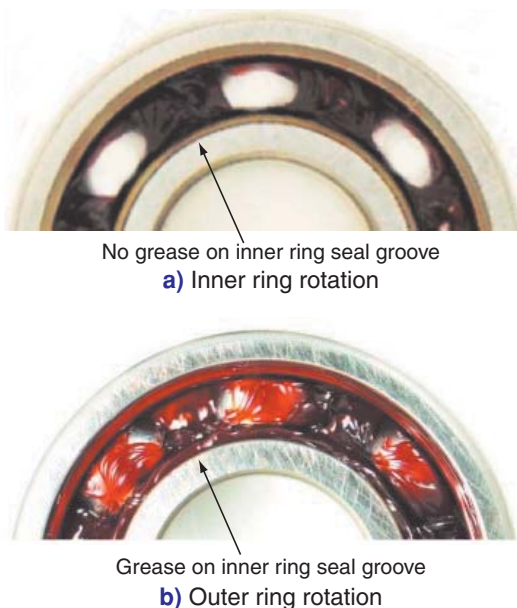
Location of grease in a ball bearing with a ribbon cage after operation
